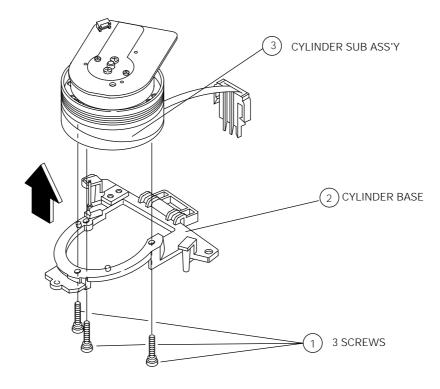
Cylinder Ass'y Removal from Cylinder Base
